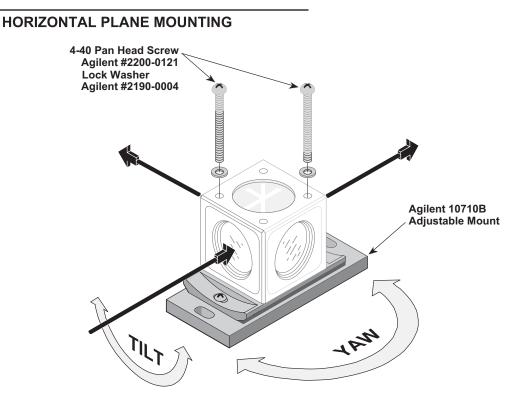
Horizontal plane mounting using the Agilent 10710B adjustable mount
